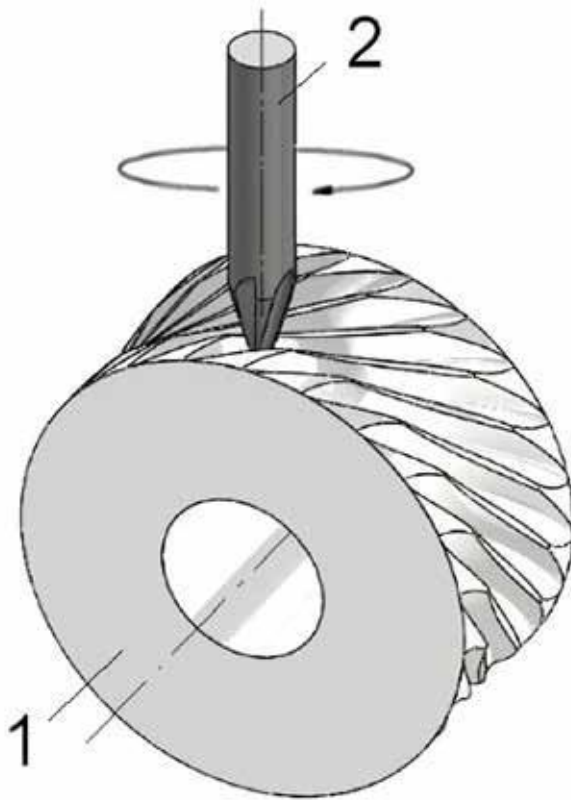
Enveloping helical gear CNC milling; 1 – enveloping helical gear, 2 – mill cutter.
